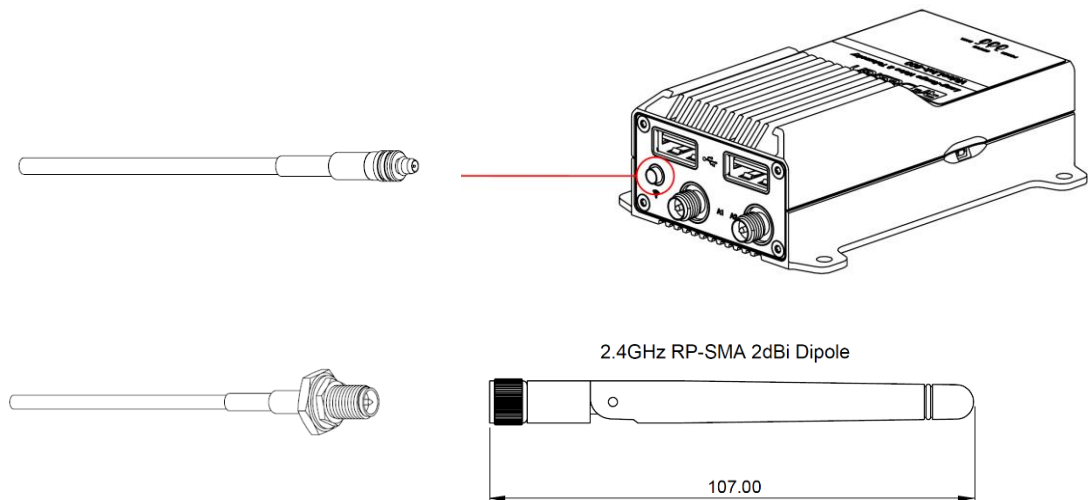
Fitting extension coaxial cable and antenna to MMCX port of VideoLink module
